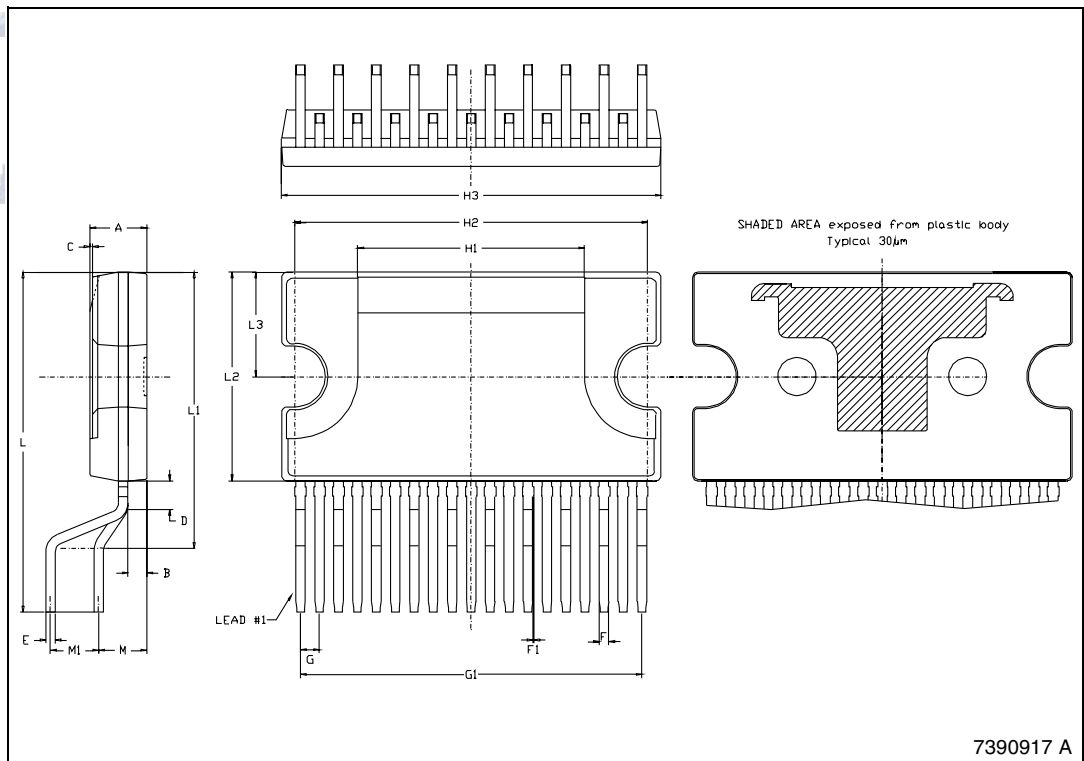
Clipwatt 19 Mechanical Data & Package Dimensions
